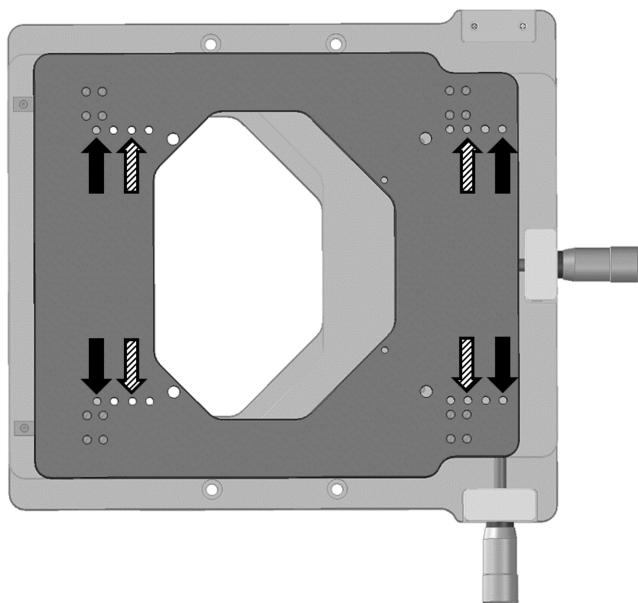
M-545: M4 mounting holes in the platform (example view from above)
